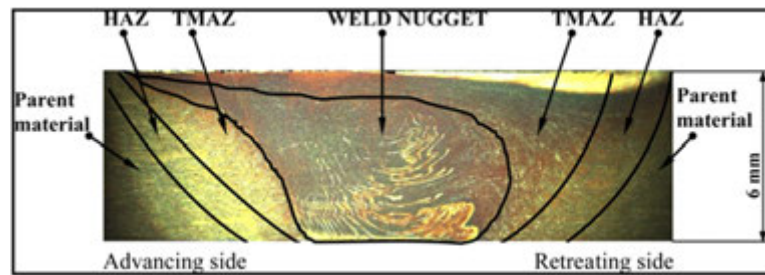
Macroscopic overview of the cross-section of the friction stir welded AA2124/SiC/25p composite to itself showing typical weld zones (Weld nugget, TMAZ, HAZ). Reproduced from Uzun, H., 2007. Friction stir welding of SiC particulate reinforced AA 2124 aluminum alloy matrix composite. *Materials and Design* 28 (5), 1440–1446.
